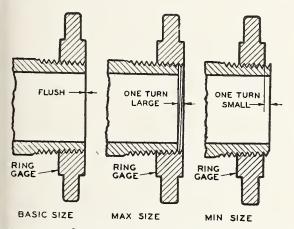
Gaging of external American National taper pipe threads with working gage.
